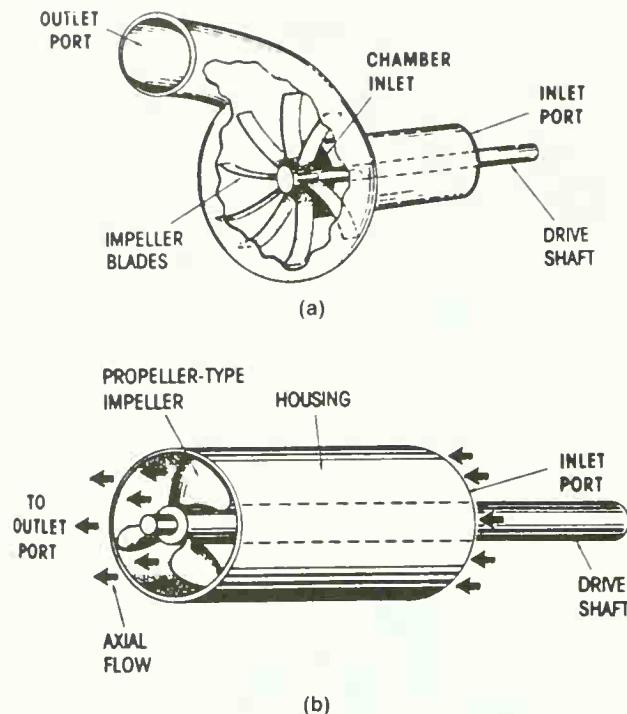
Two types of centrifugal pumps. (a) Volute type. (b) Axial-flow type.
